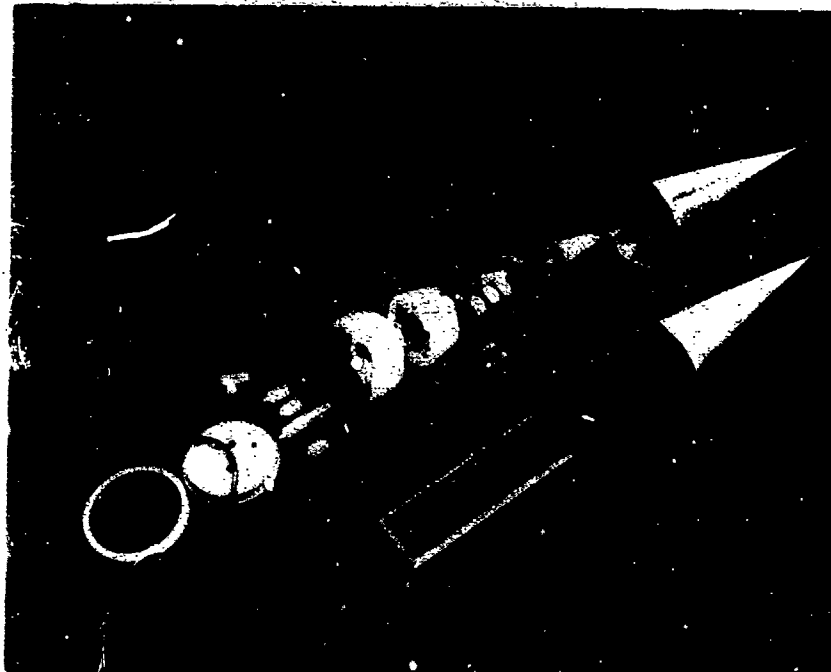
Exploded View of Instrumented 10° Half Angle Cone
